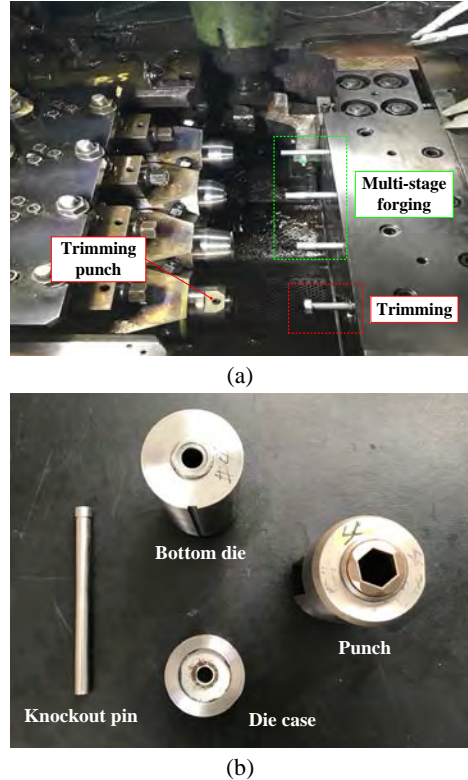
Trimming experiment of Al6061 alloy bolt head: (a) cold-former and (b) brimming dies
